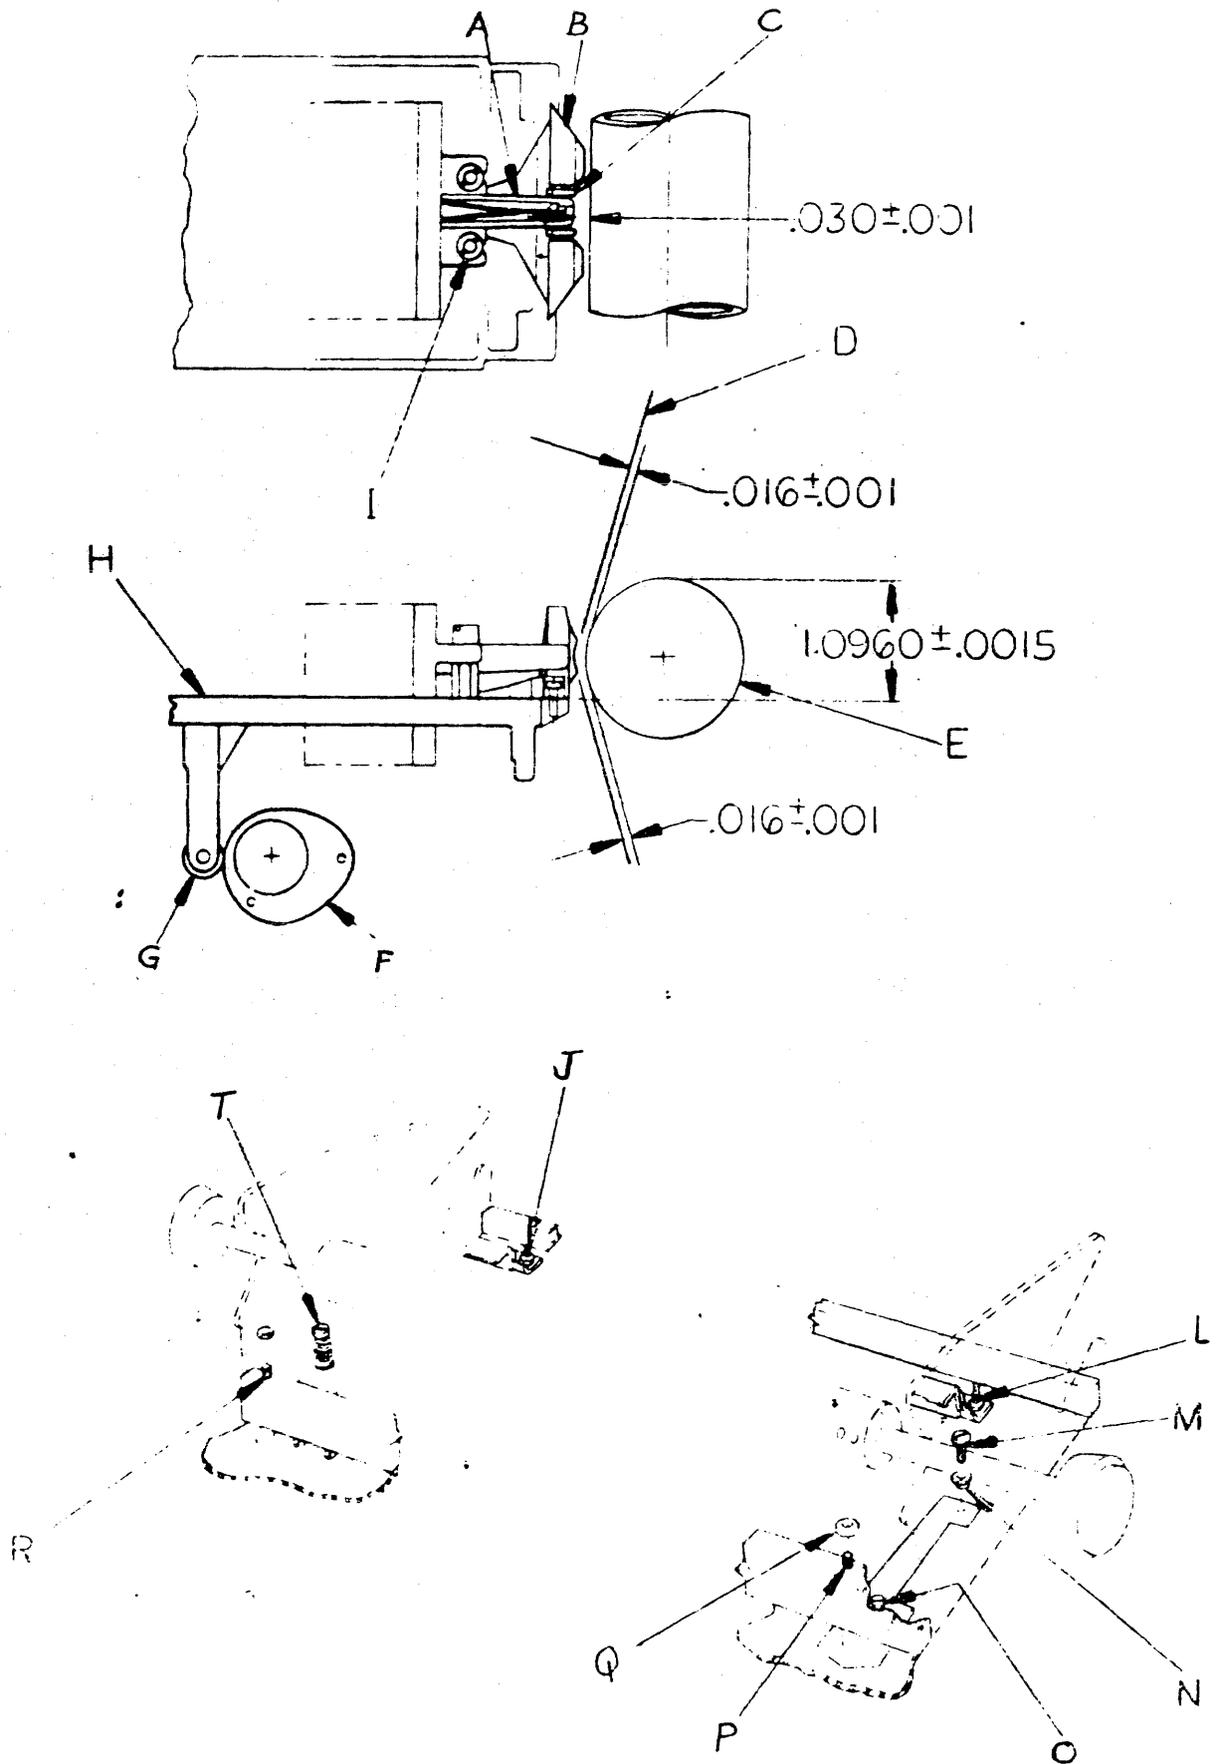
PLATEN-PRINTHEAD ADJUSTMENTS
